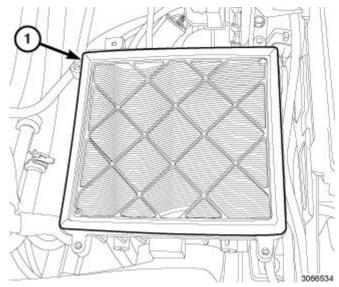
Air Cleaner Element Courtesy of CHRYSLER GROUP, LLC
